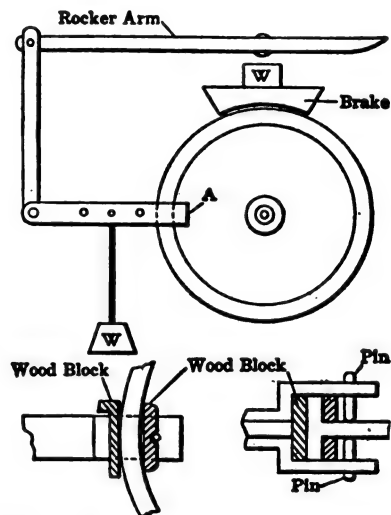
AUTOMATIC FEEDER AT LIBERTY BELL MILL
